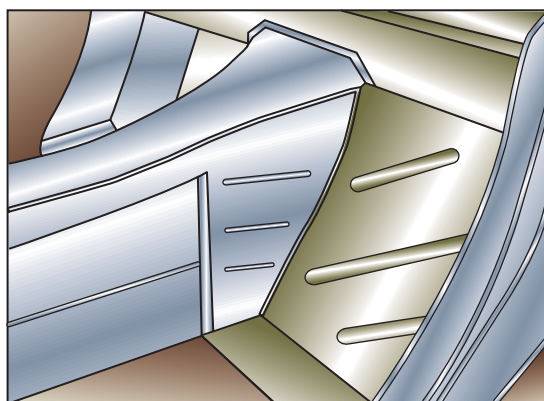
Laser welding on aluminum spaceframe tunnel.
